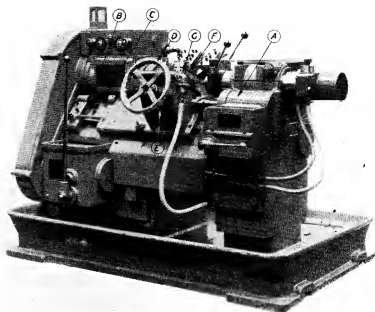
Front of lathe showing details of front tool slide equipment and control gear.
